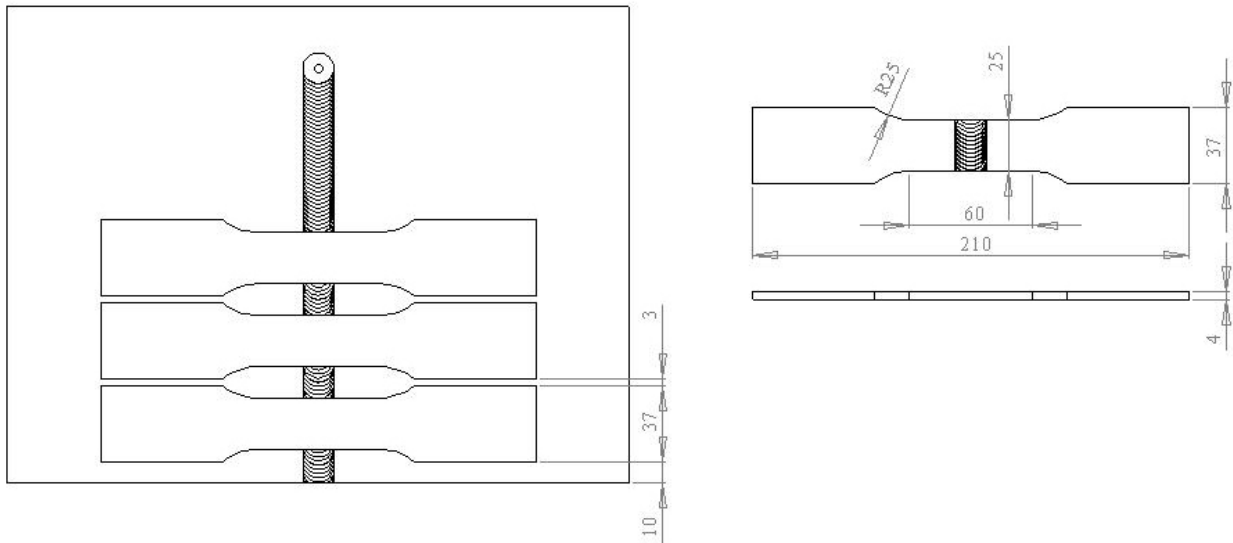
Geometry of the flat tensile specimens used to evaluate the tensile properties of the FSW joints and base material (dimensions in mm)
